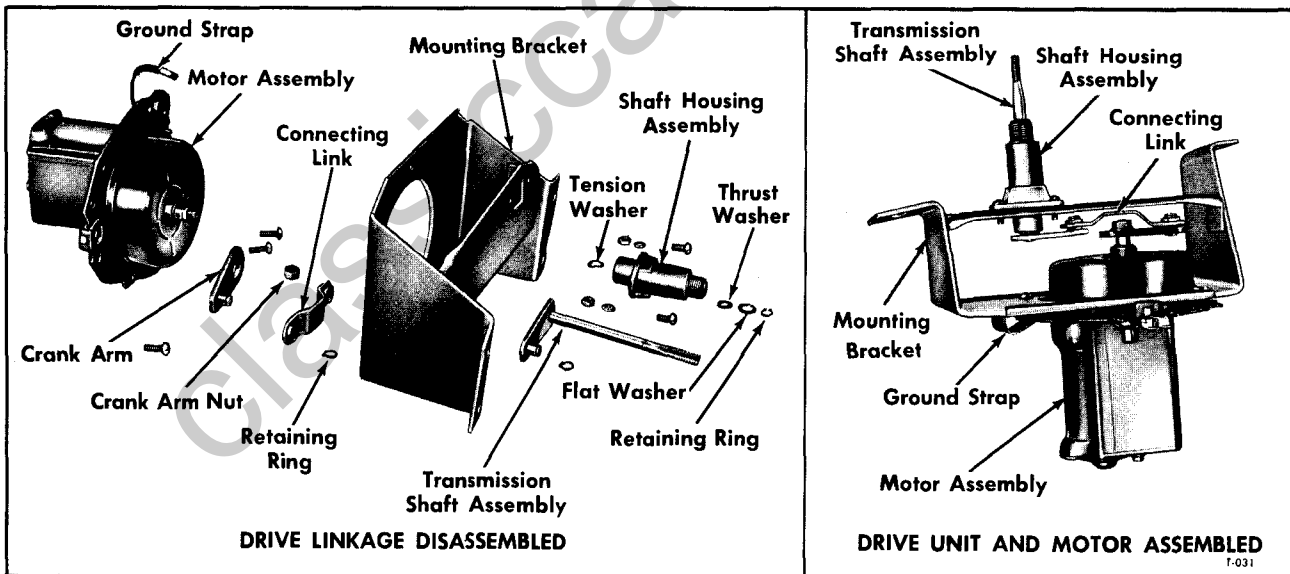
Wiper Motor and Bracket Components (Steel Tilt Cab)
